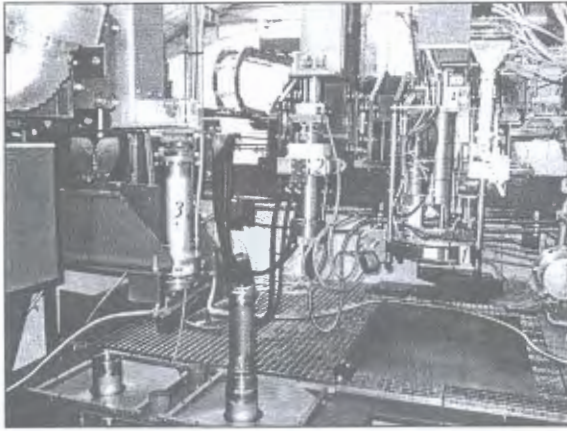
General view of special installation for welding the cap with cartridge P-89 in the chamber: 1 — head for welding the cap to the cartridge; 2 — head for helium pumping in and welding of sealing (welding in) of the union tap; 3 — head for cartridge testing for tightness with helium after completion of the series of sealing works
